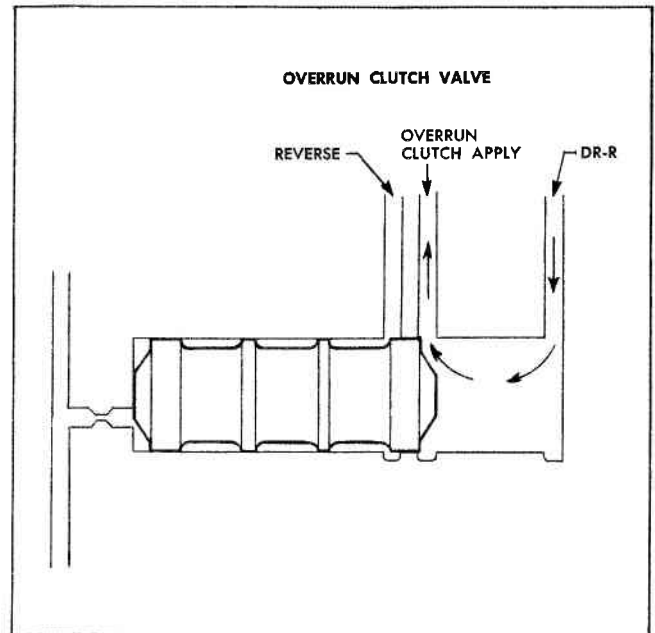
Overrun Clutch Valve Position in Drive Right—First Speed or Third Speed
